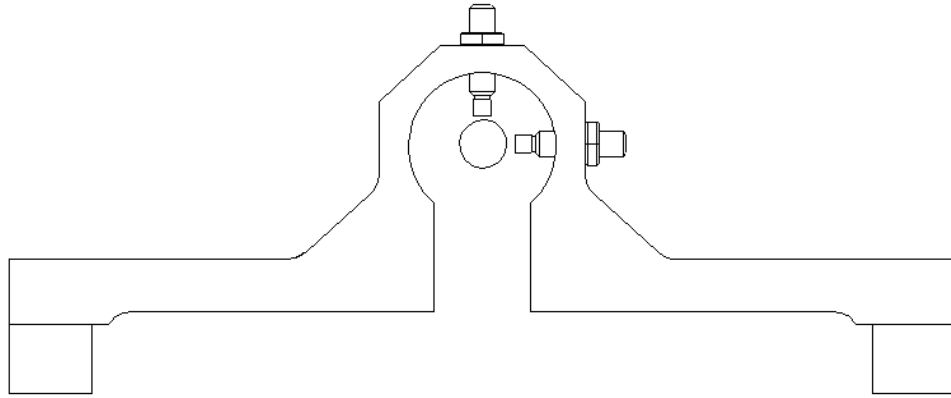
Side view of Bently-Nevada® proximity probes mounting block.
